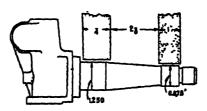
GRINDING TWO SURFACES AT ONE SETTING OF THE WORK
